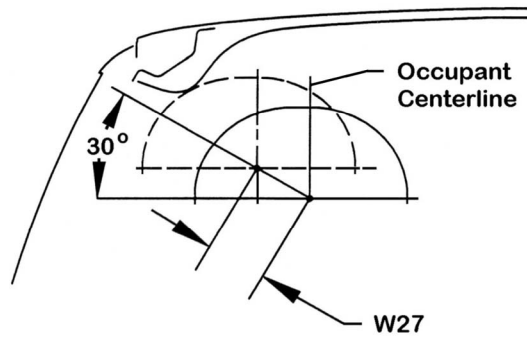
B—REAR VIEW HEAD CLEARANCE
